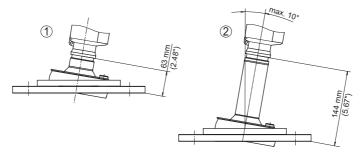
NivoRadar 3300, flange with lens antenna and swivelling holder
